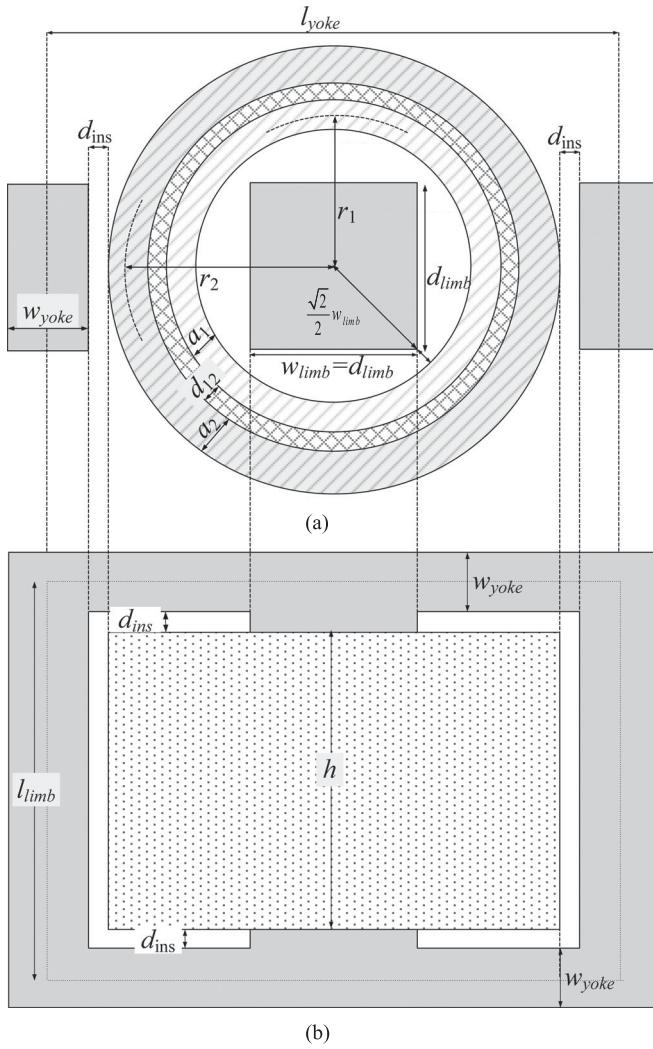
Transformer core and windings; (a) top view; (b) side view.
